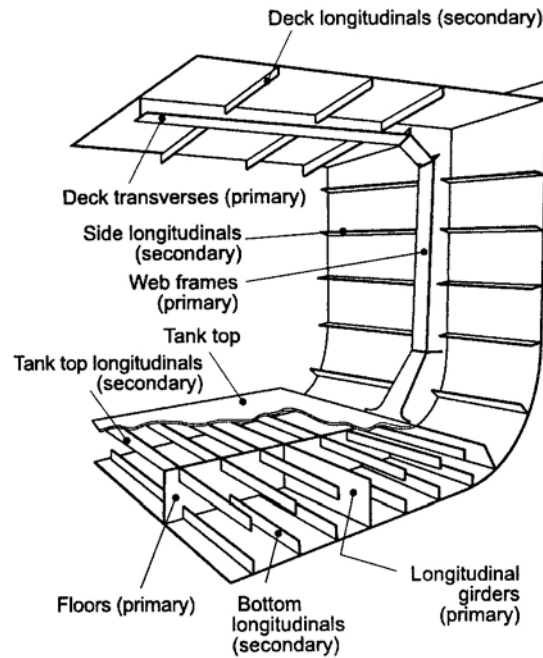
Definitions of primary and secondary stiffening members of the hull structure (longitudinal framing system)
